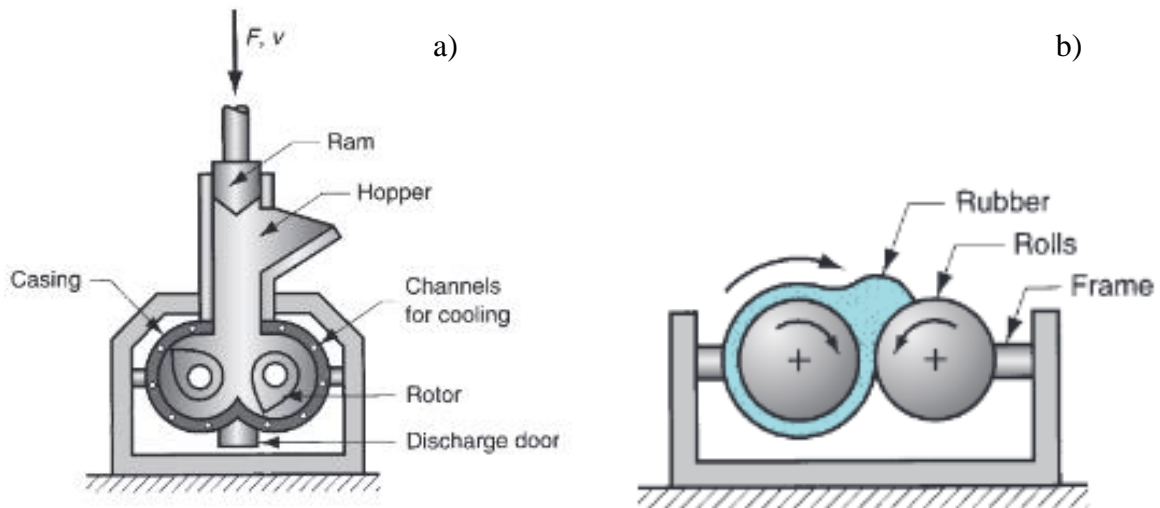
a) Internal mixer, b) 2 roll mill machine [11]
